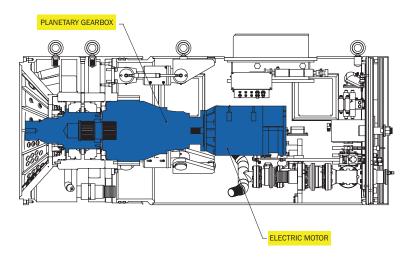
Center drive MTBM contains a single motor that drives a planetary gearbox coupled to a drive shaft.
